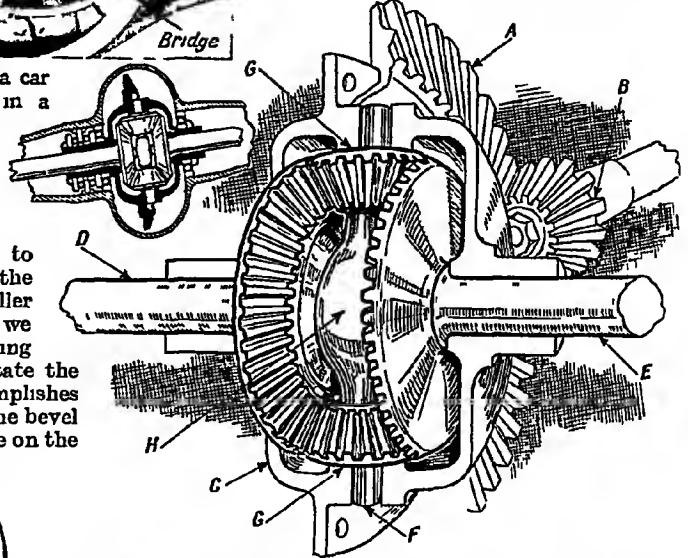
Cut-away view of orthodox bevel differential gear. The small view shows how differential casing is mounted to run as a unit in axle casing.
